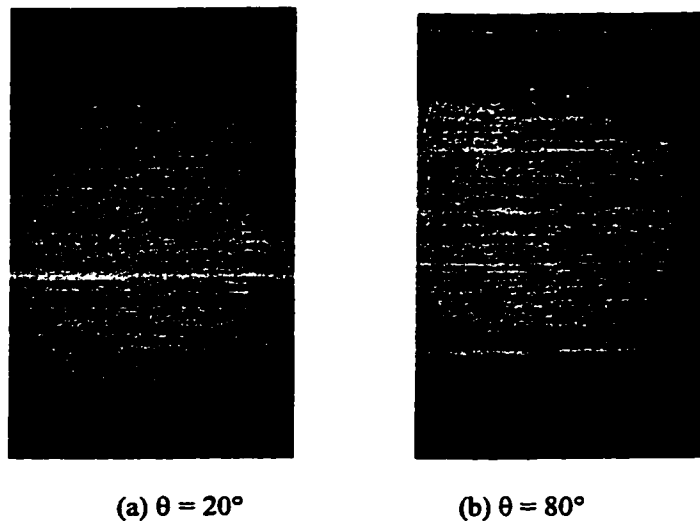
Fracture surface morphologies of $I(\theta)$ specimens; the failure mode of in-ply crack.
